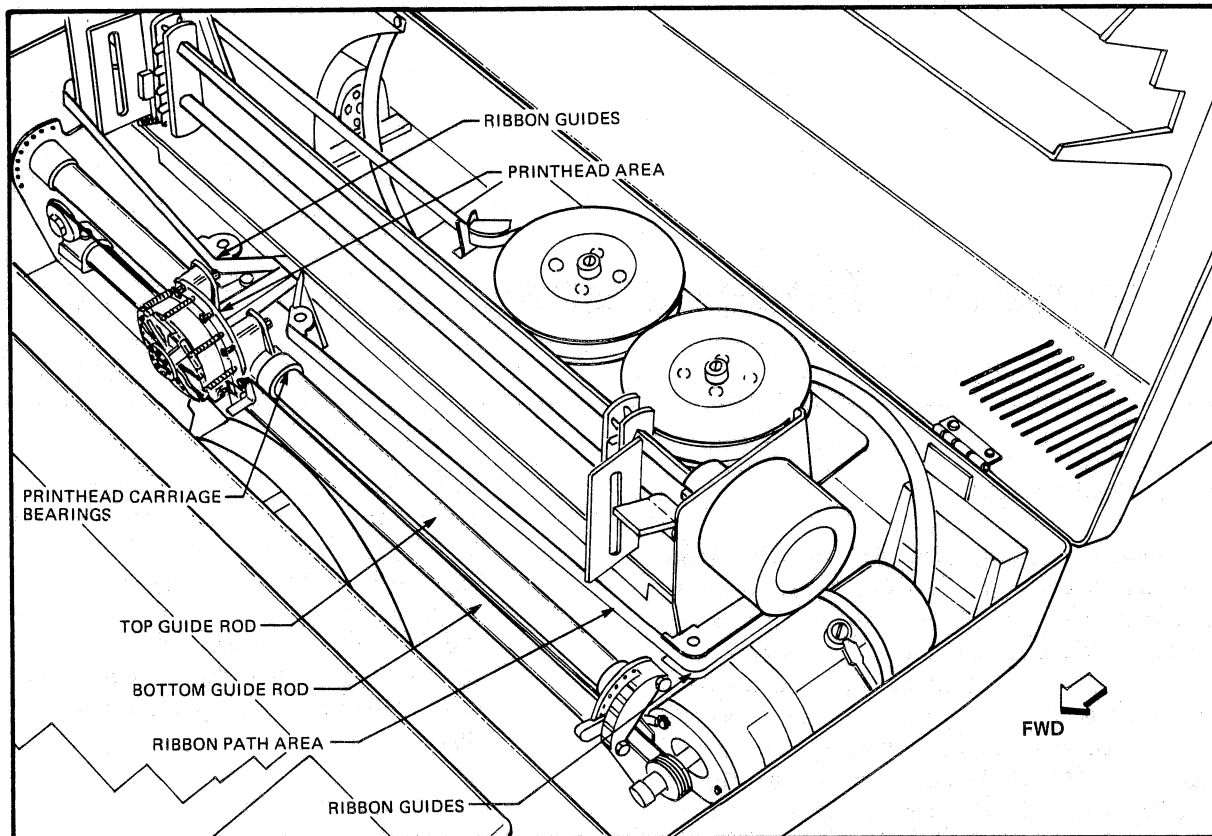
Printhead Area, Guide Rods, and Ribbon Guide
